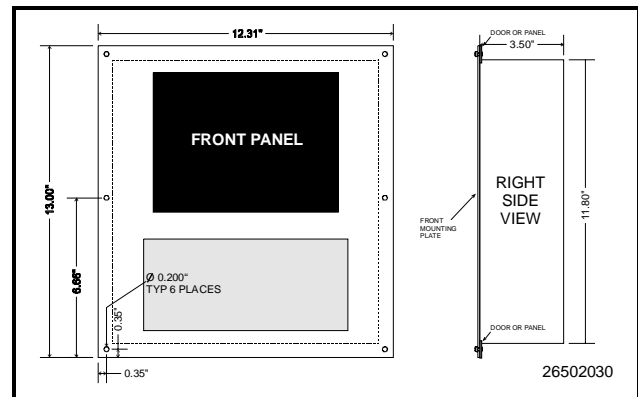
Einstein Flush Mount Mounting Dimensions
